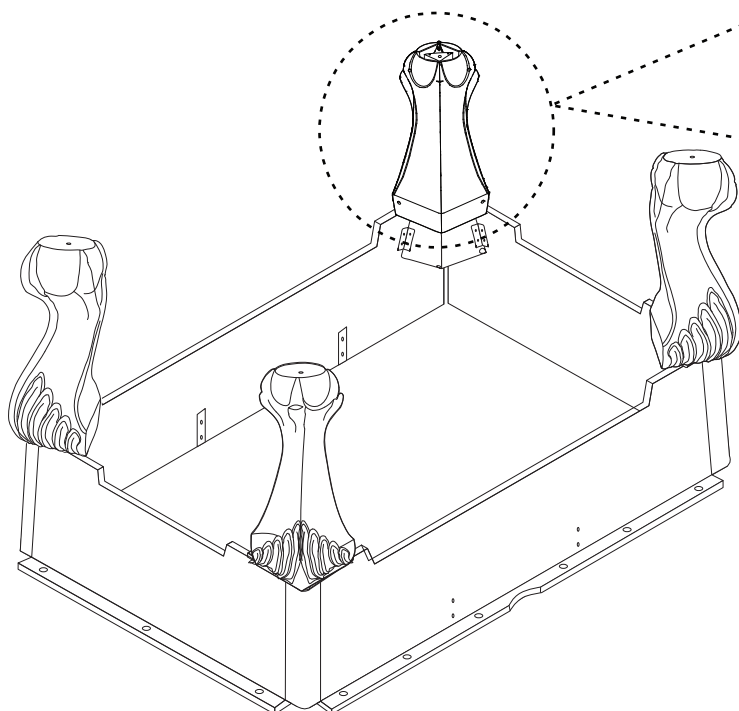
Assembly / Ensamblaje FIG. 6 / FIG. 6 Assemblage
